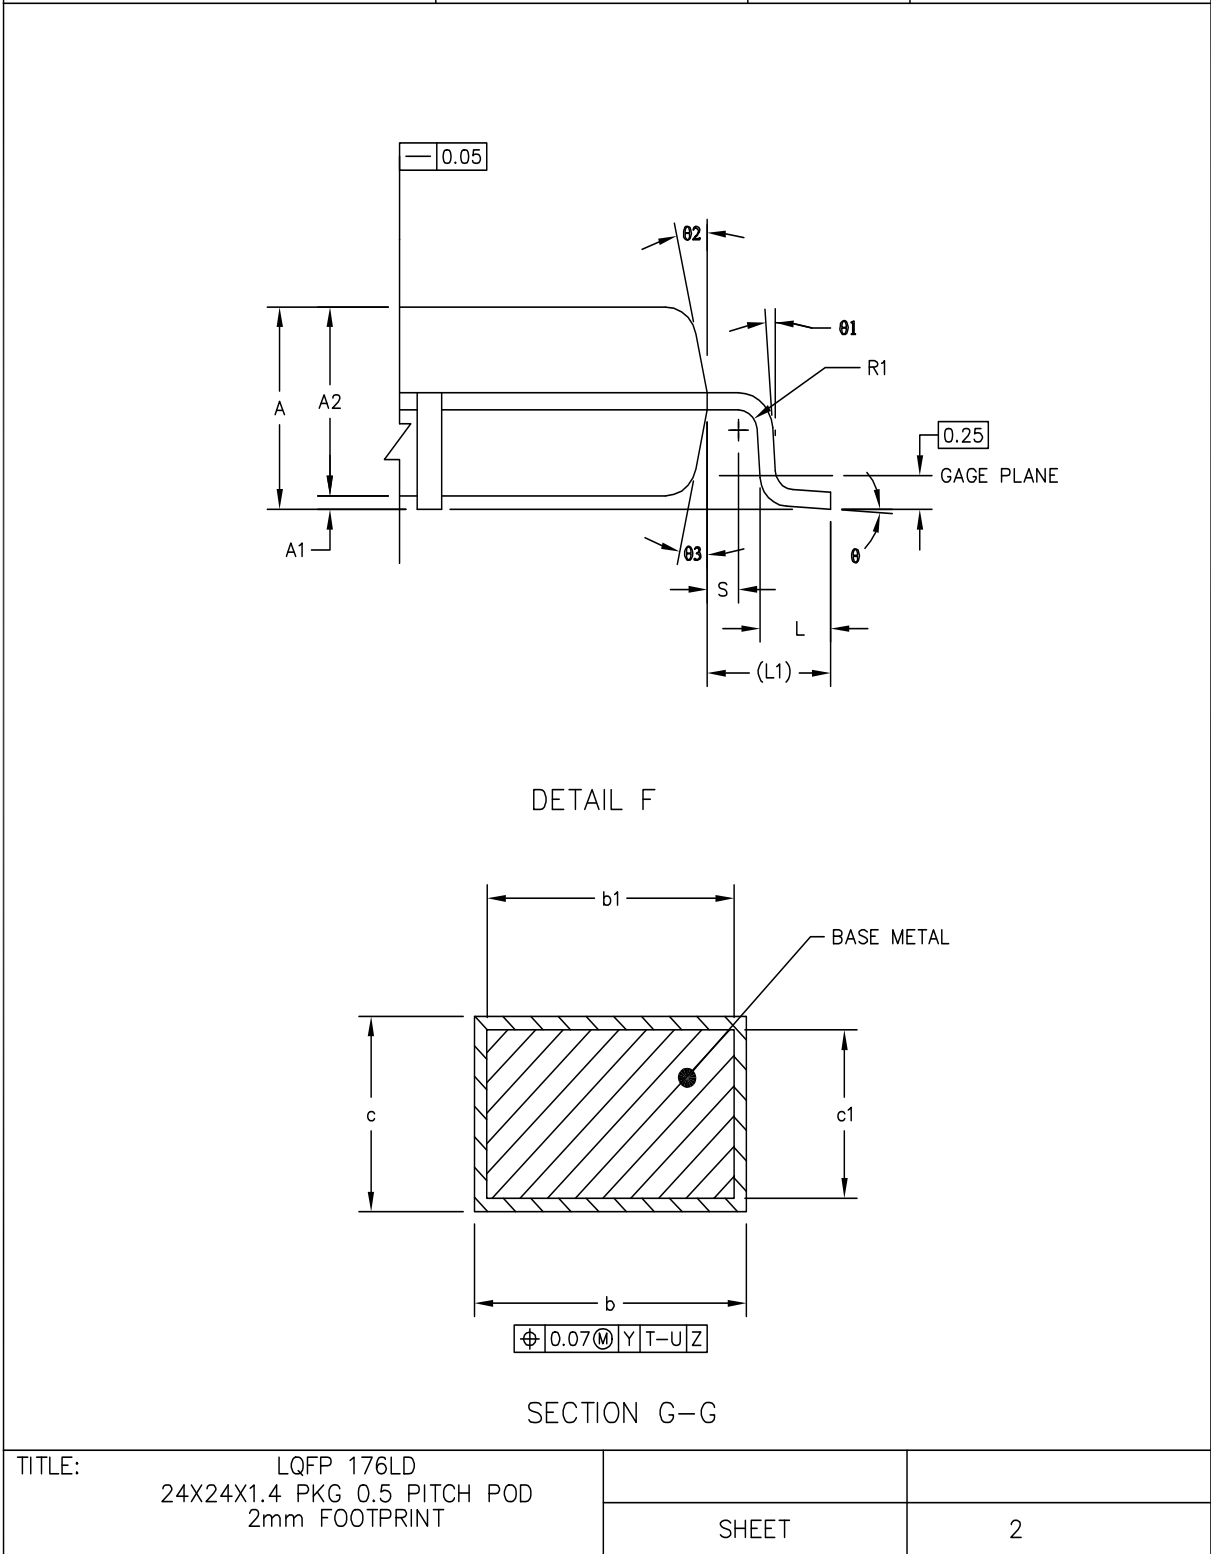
176 LQFP mechanical drawing (Part 2 of 3)
